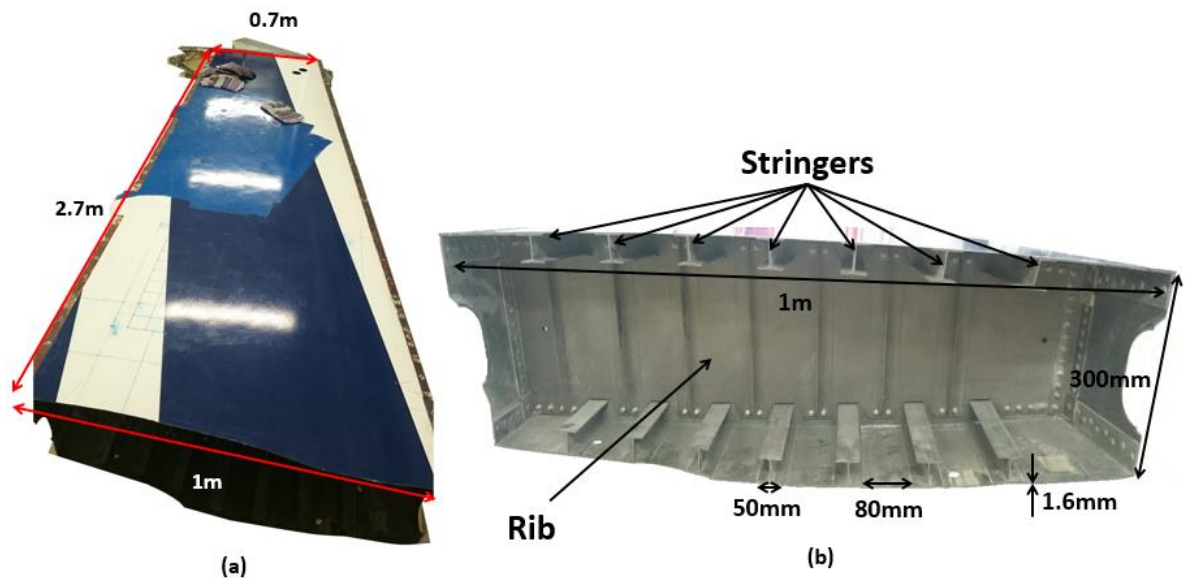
A320 vertical stabiliser (a) and side view showing internal structure (b) with dimensions
